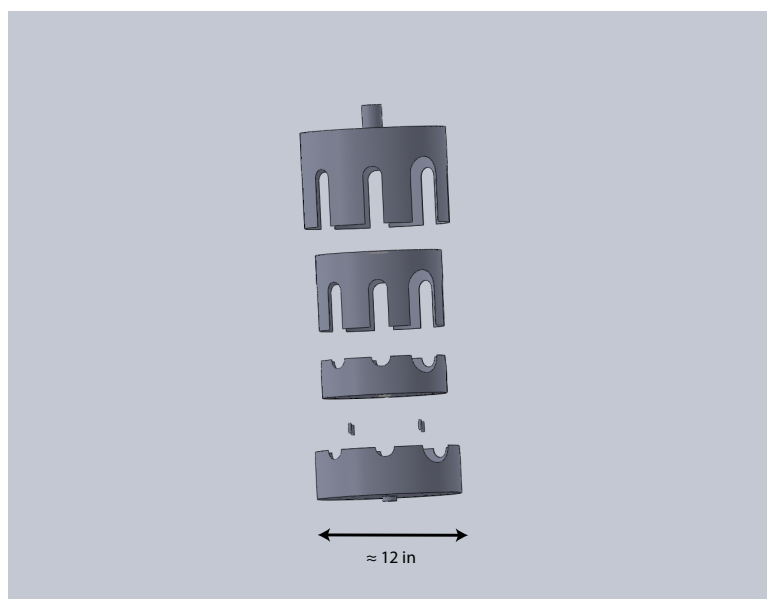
Exploded view of magnetic shield assembly. Two layer shielding is designed to reduce magnetic field fluctuations without losing optical or electrical access to the ion trapping chamber. The shield is designed to press fit together with minimal deformation.
